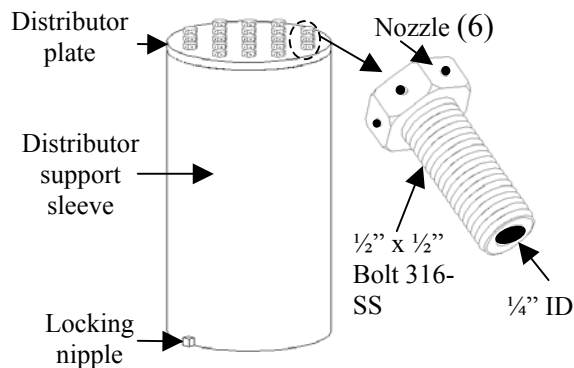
Pilot-scale distributor plate design with detail of nozzle bolts.
